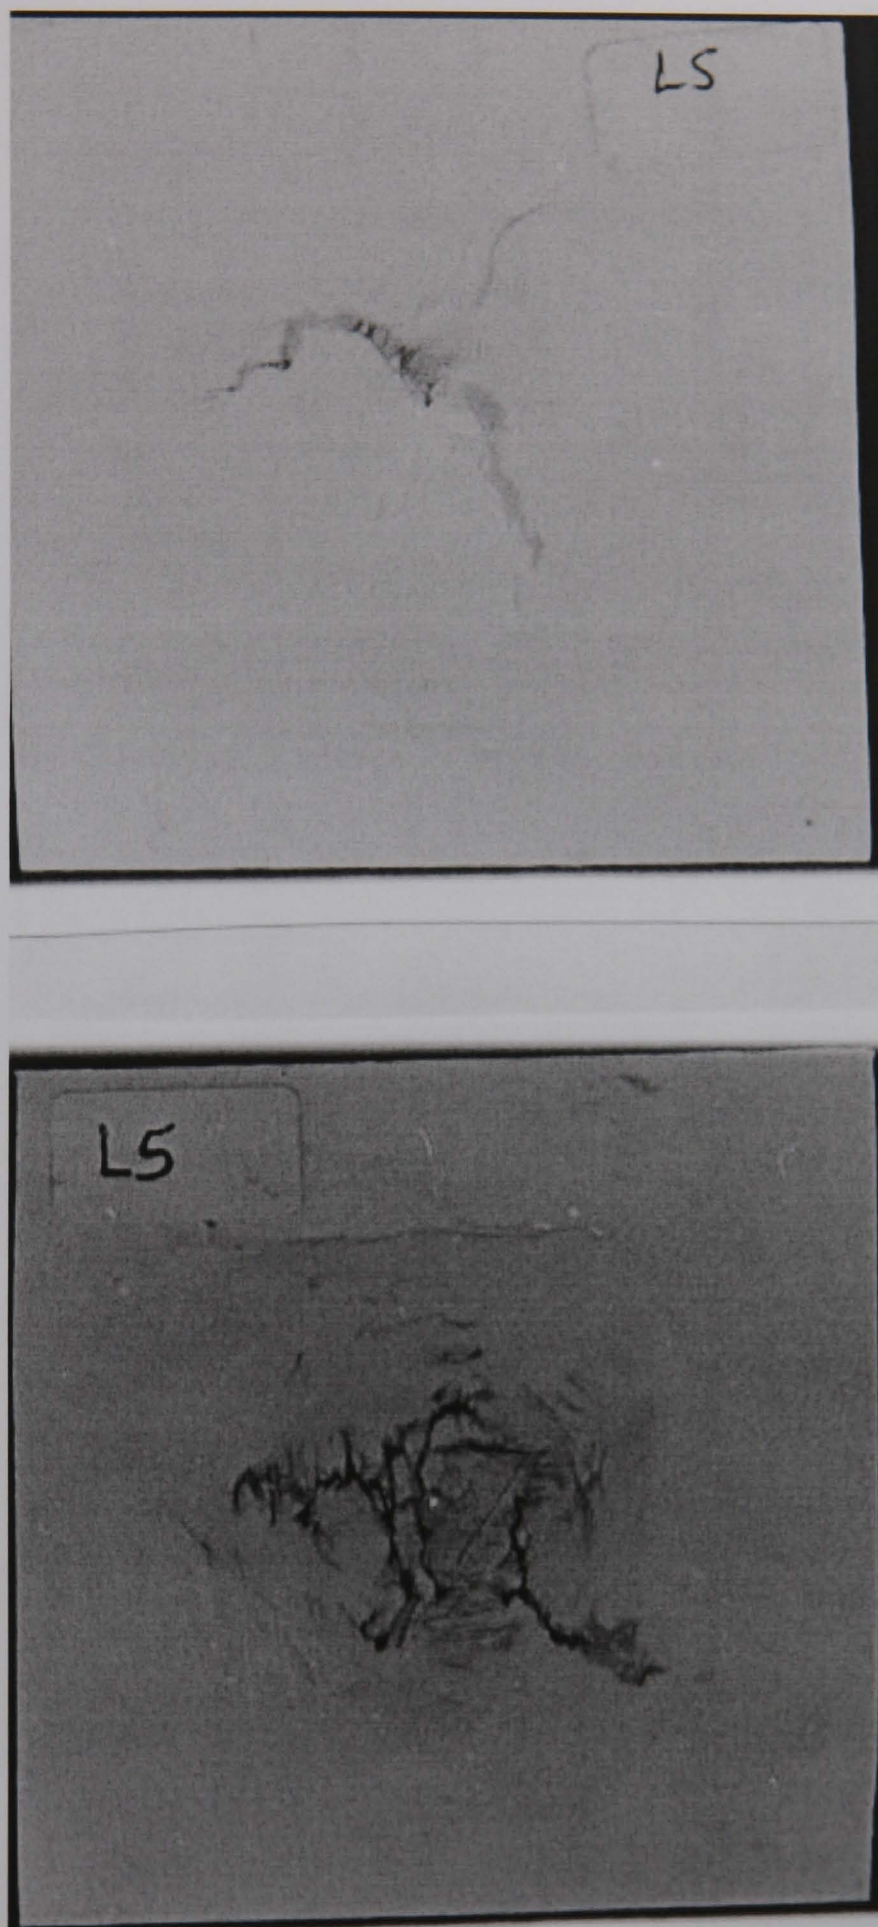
Cracks which are formed during impact on the tensile and compressive sides of the SMC specimens.
